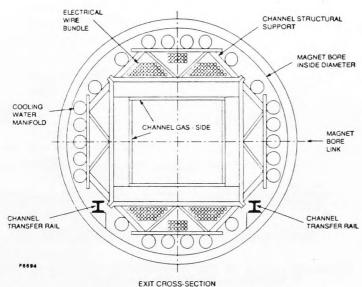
A Typical Cross-Section View of the Demonstration Generator Installed in the Magnet Bore
